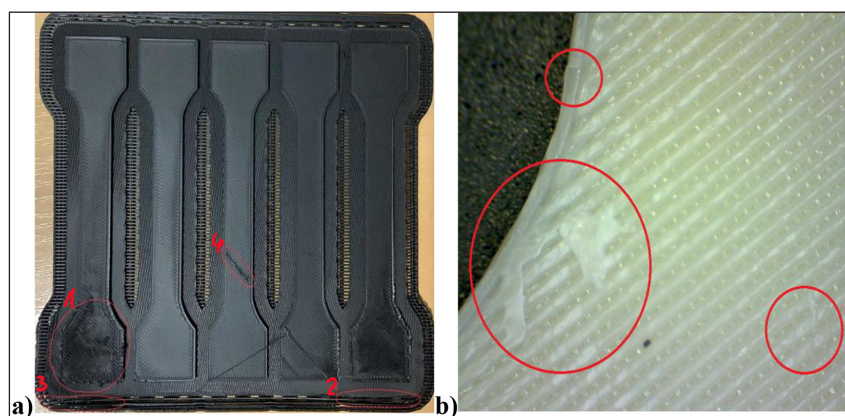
(a) Major errors of printing ABS-CF samples: (1) rolled up corner, (2) and (3) detachment of raft from the table, (4) underextrusion caused by clogging, (b) minor errors of printed ABS samples
